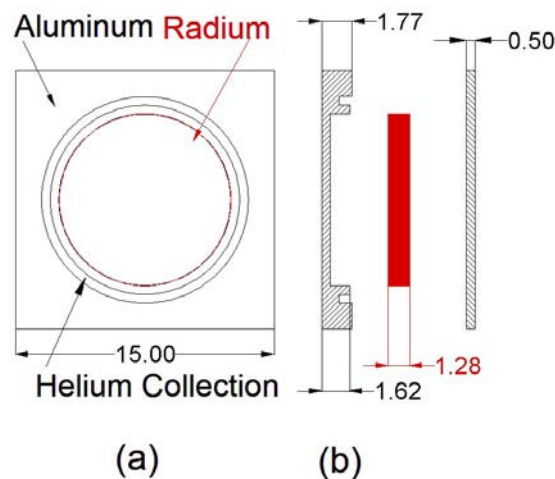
Example of a high-powered radium target for electron irradiation with (a) top view of the target and (b) details of the three sections of the target assembly. Dimensions are in mm. (Reproduced from Ref. [191] with permission courtesy of [AIP Publishing]).
